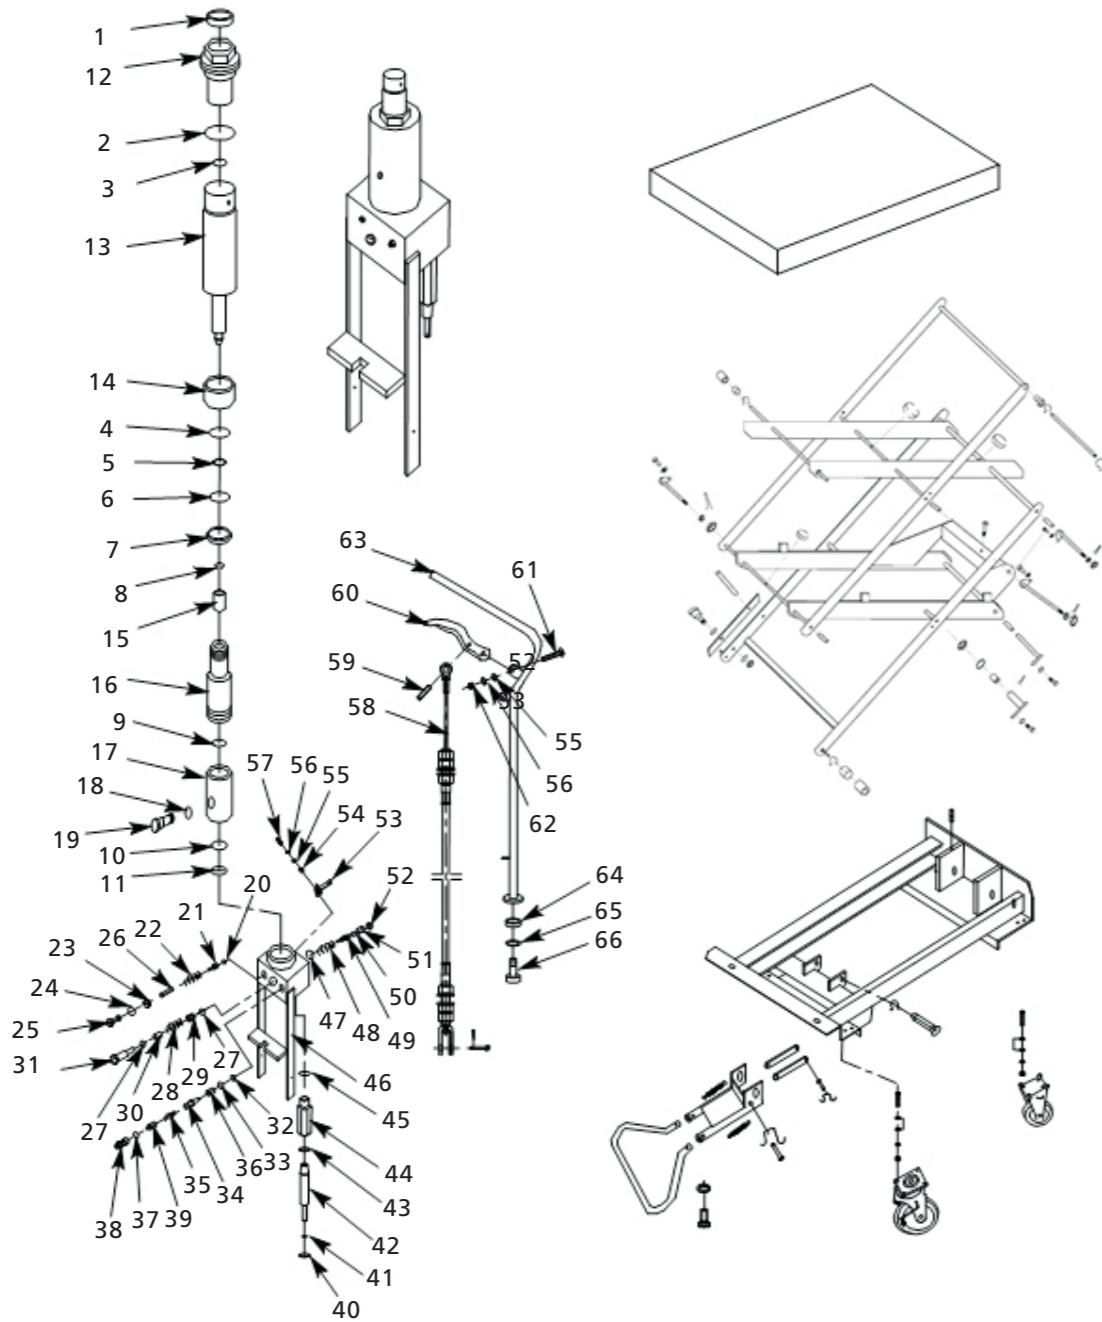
Repair Parts Illustration for Roller Transfer Scissor Carts (Model 33W295)
